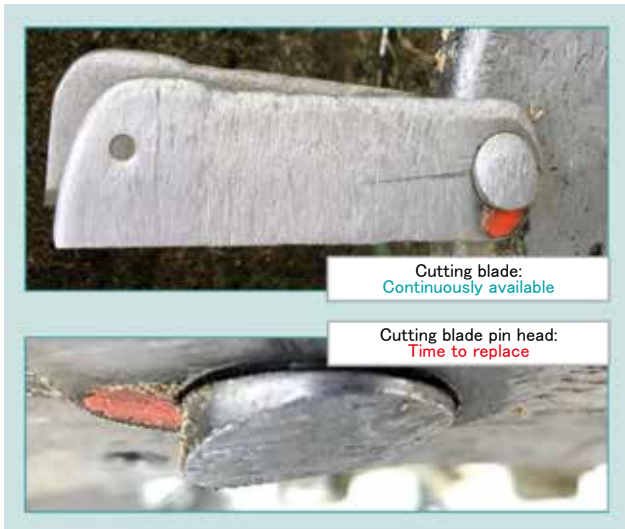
Wear Status of Cutting Blade and Cutting Blade Pin Head
